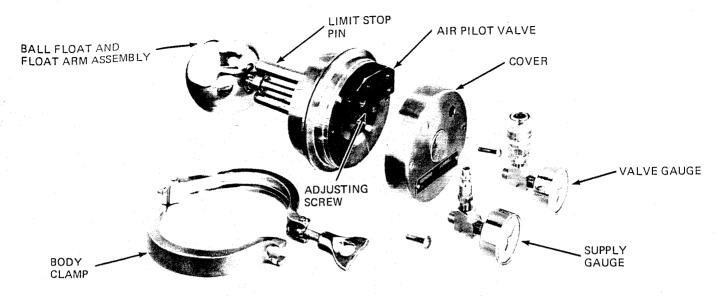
Model 30-101 and 30-102 Level Control - Disassembled
